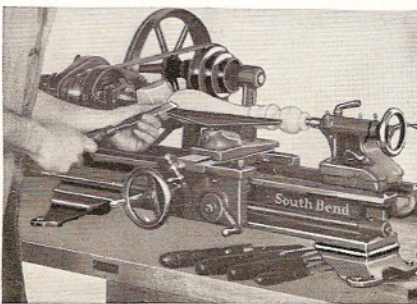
Lathe Equipped with Hand Rest for Wood Turning and Pattern Making.
